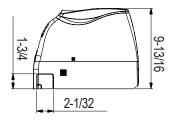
LSN180HSV4 and LMN248HVT Dimensions.
